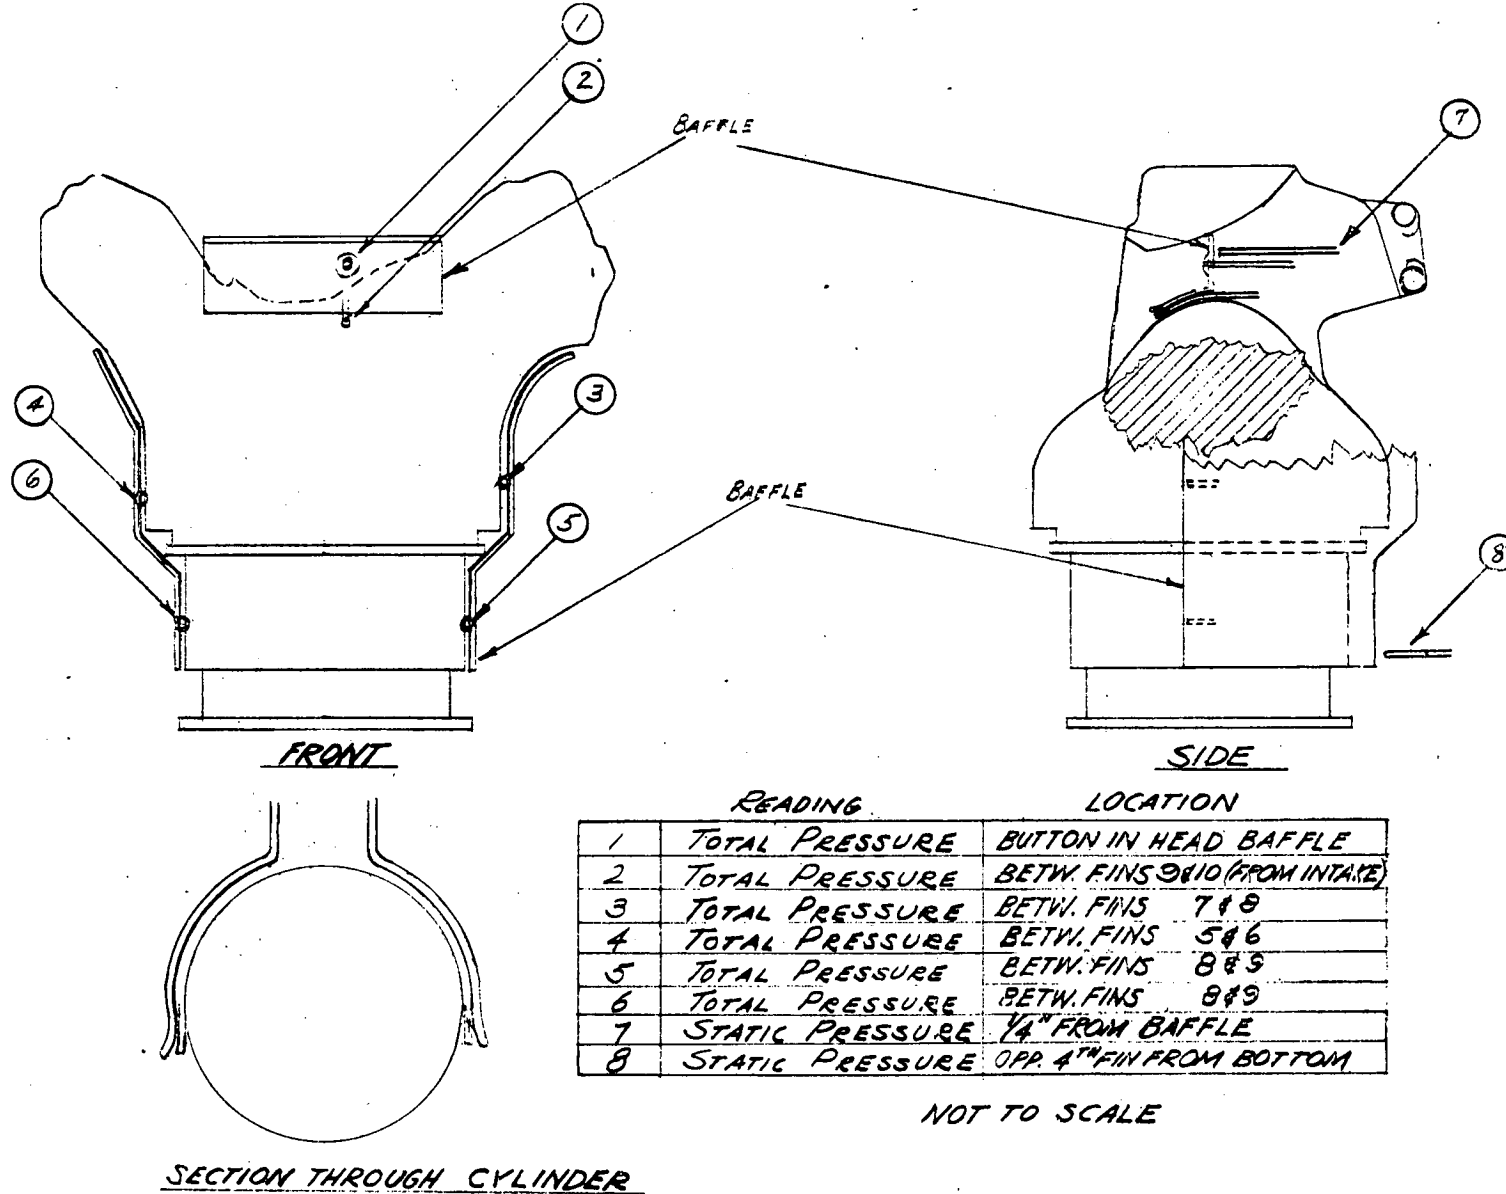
Location of tubes for measuring the front and rear cylinder pressures on the B-24D engine installation.
